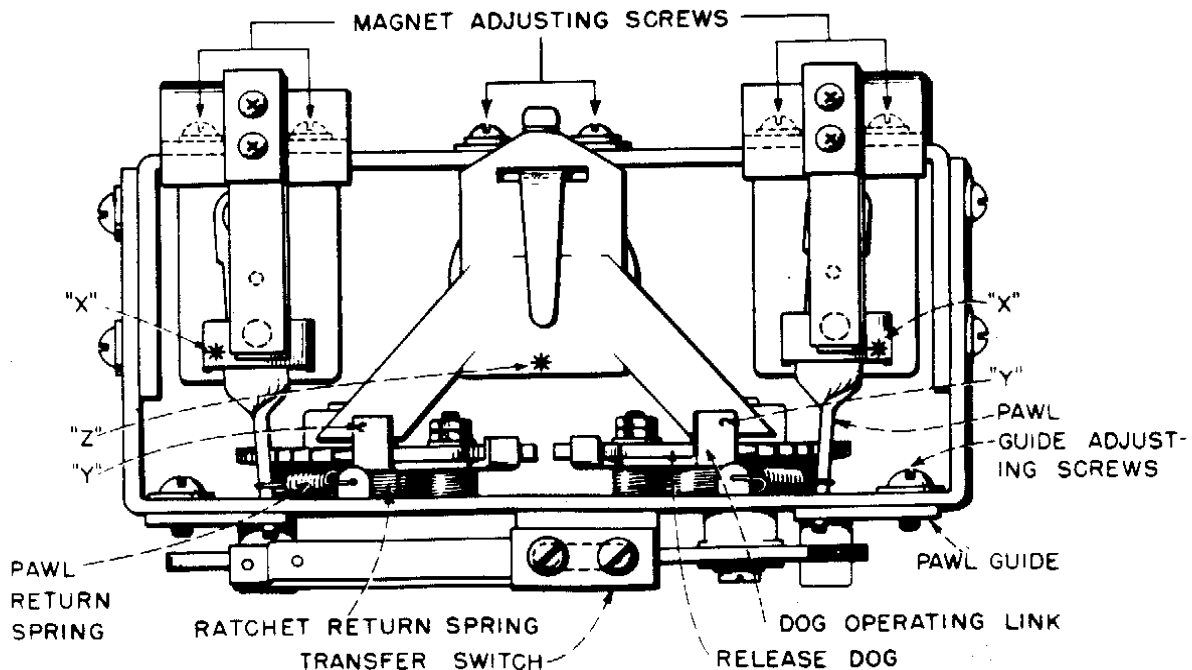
TOP VIEW OF STEP SWITCH ASSEMBLY
